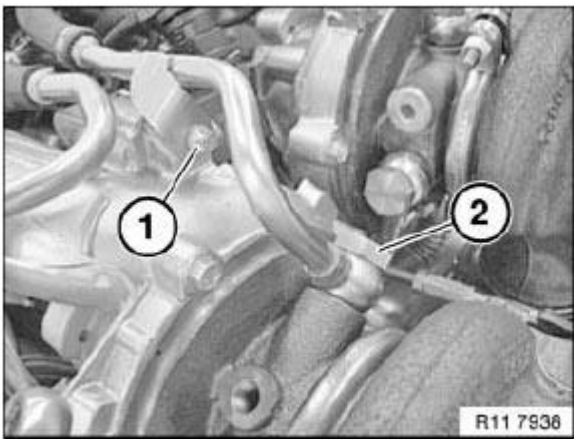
Identifying Coolant Return Line With Banjo Bolt
